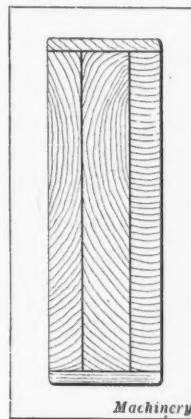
Cross-section of Wood Sill for Chassis Frame
